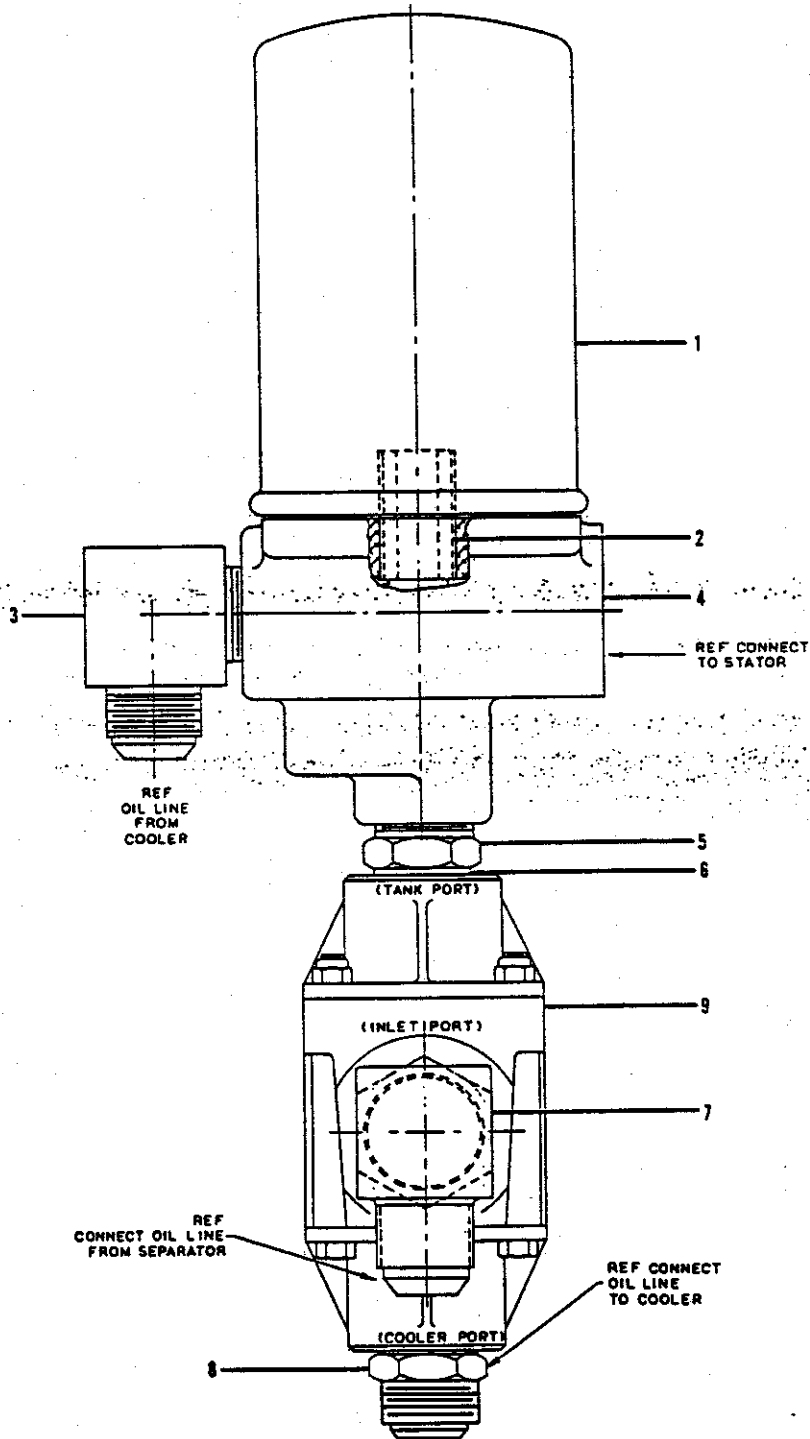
OIL FILTER AND BYPASS ASSEMBLY
